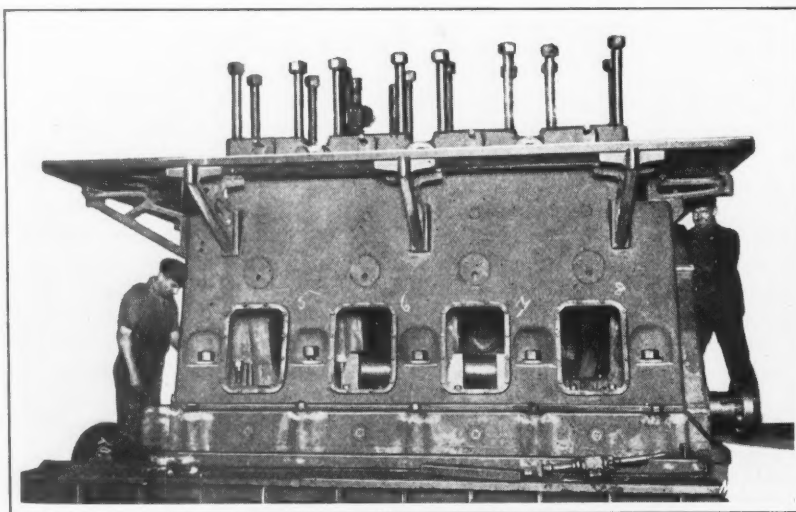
Engine after the Crankshaft has been fitted, and the Frame assembled, with Cylinder Liners in Place
